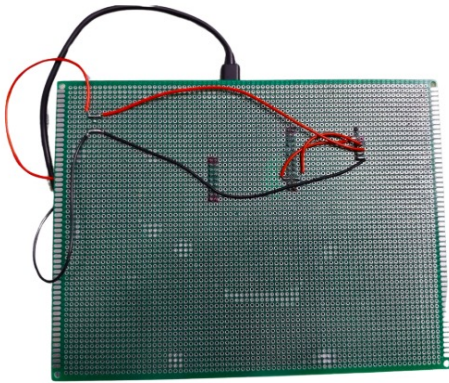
Back view of perf board showcasing the soldered ends and connections.
